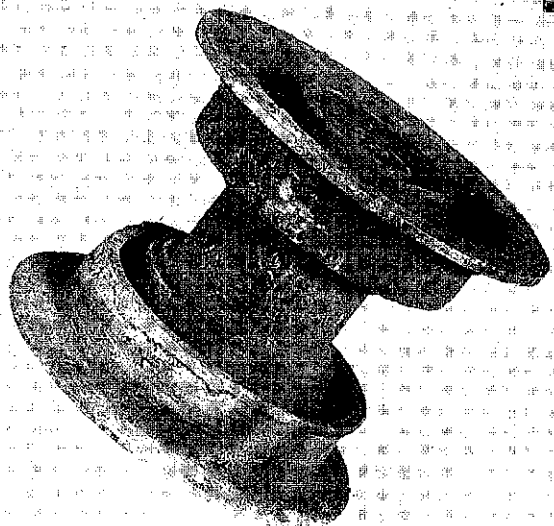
MILD STEEL BAR WELDED IN TO REPLACE CHIP IN DIESEL CATERPILLAR 50 TRACK ROLLER.
